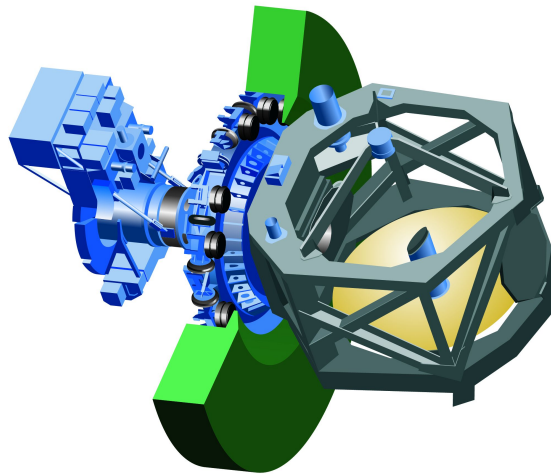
CAD drawing of the SOFIA Telescope Assembly. The green disc represents the pressure bulkhead, where the Telescope Assembly is mounted by a hydrostatic bearing. The mirrors and metering structure on the right side are located in the open cavity, whereas the science instrument (not shown) is mounted at the flange on the cabin side to the left of the image. © DSI
